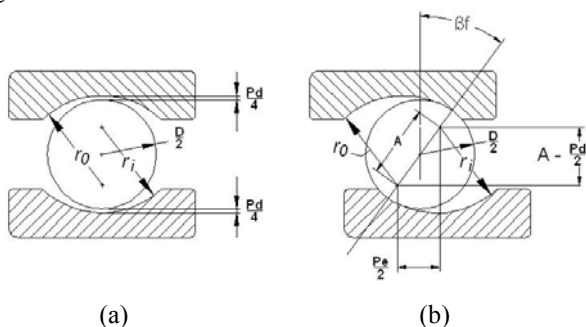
Cross section of a radial ball bearing showing ball-race contact due to axial shift of inner and outer rings. (a) Initial position. (b) Shifted position
